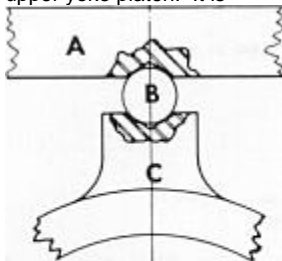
(A) upper yoke platen; (B) steel ball; (C) upper boss of proving ring. Retainer clip not shown.
